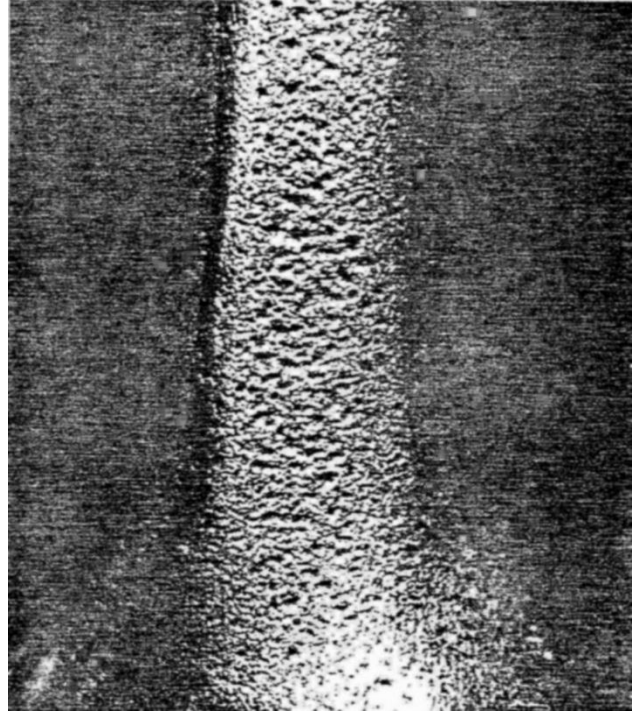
403SS Rotor Blade Leading Edge Pitting-8X
